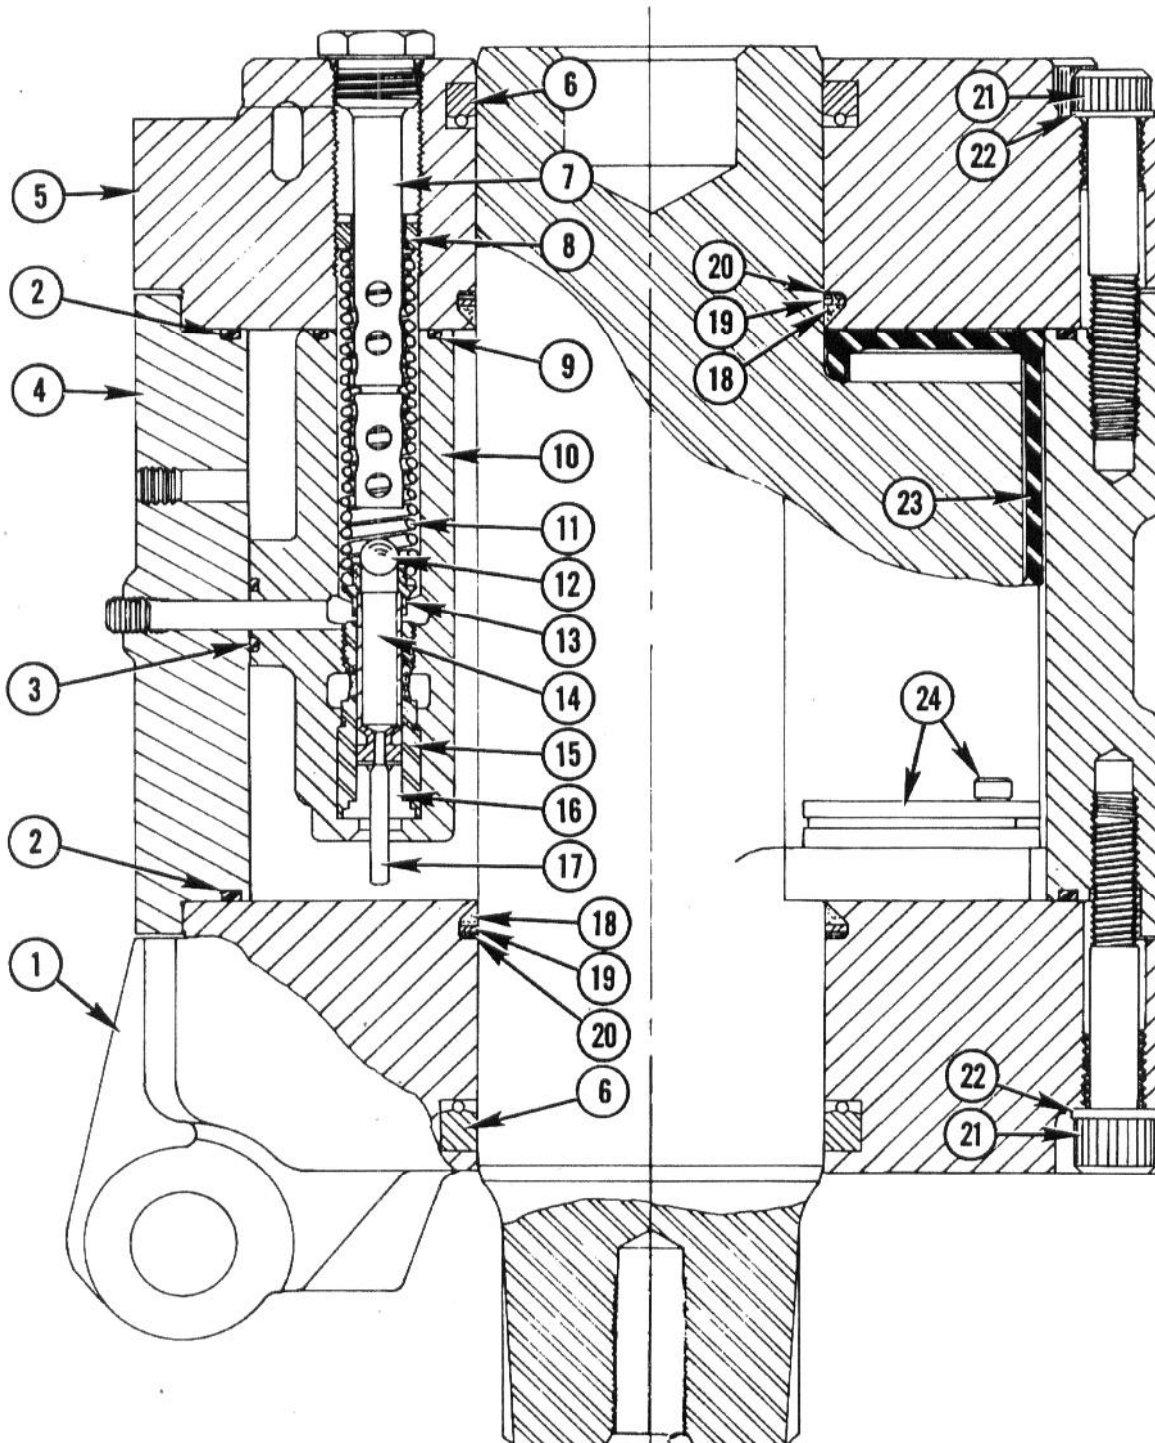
Cutaway of Rotary Cylinder MF Part No. 729 829 M91 — Relationship of Seals and Cushioning Mechanism Shown
